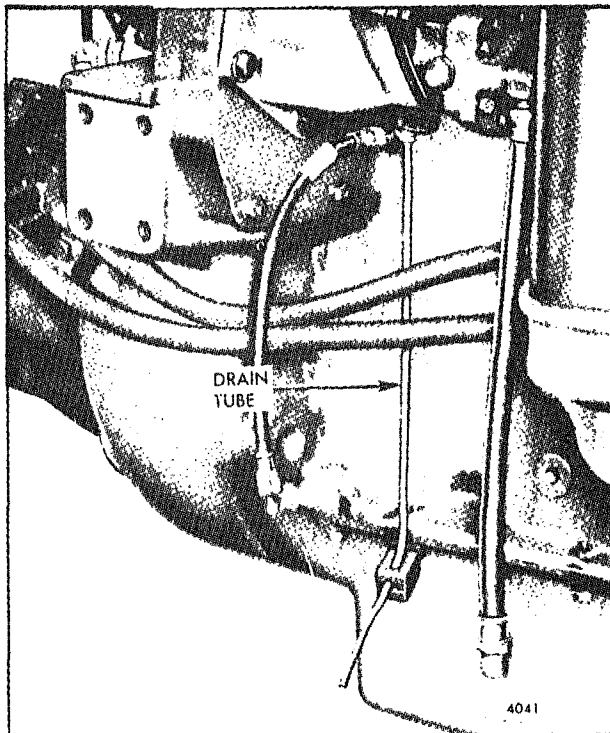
Air Box Drain Tube Mounting (In-Line Engines)
